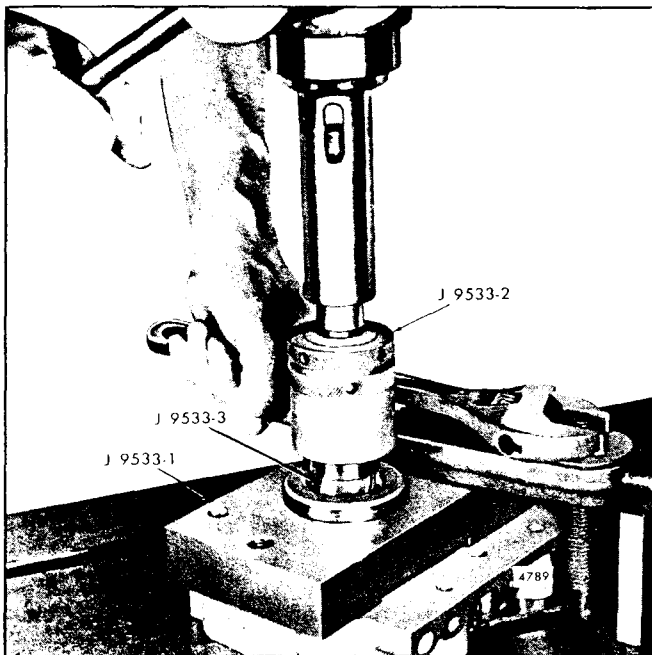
Positioning Cutting Tool in Fixture Guide
